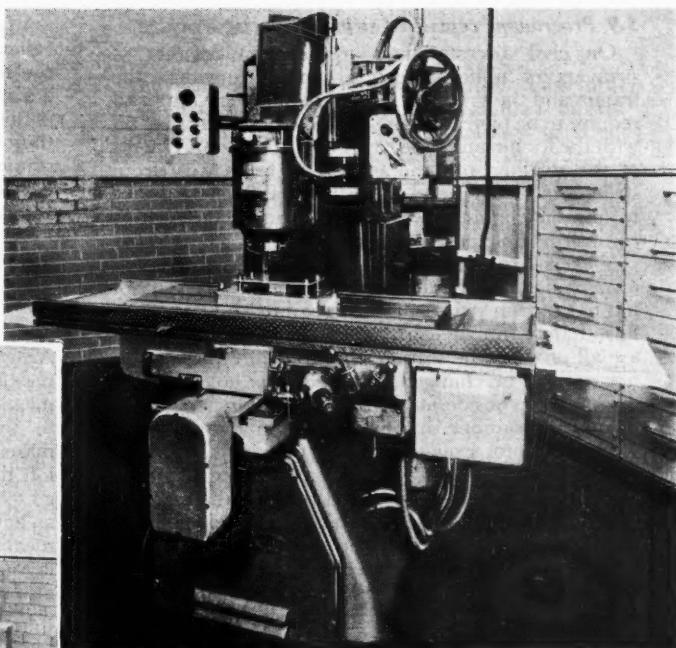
shows a Wadkin high speed vertical milling machine fitted with this device. The system employs analogue voltages to interpret the numerical position of the machine tool table. The table positioning is read directly off the lead screw, and a gear box and potentiometer series system is geared to the lead screw. In the control itself, voltages are tapped off toroidal transformers by means of relays, which are operated by information taken from punched tape passing through the reading head. The voltages are matched with the voltages from the potentiometer, and thus control the machine tool position. Continuous interpolation is provided between every three points specified on the programme, ensuring accurate profiling and good surface finish. The punched tape passes through a reader, which records the information in a relay store where it is retained until it is required when the next piece of instruction is fed through from the tape. The speed of the tape is controlled by the cutting speed of the milling machine, so that the information being worked upon at any time always refers to the place where the machine is cutting. Adjustments for cutter size and cutter wear are provided.
